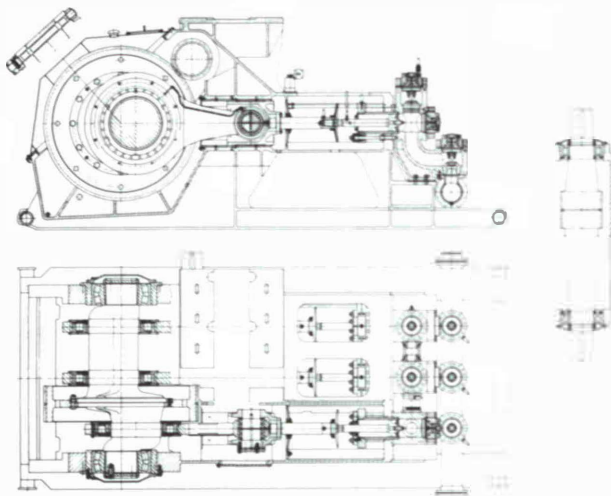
Sectional drawing of a 3-cylinder piston pump with open cylinders
